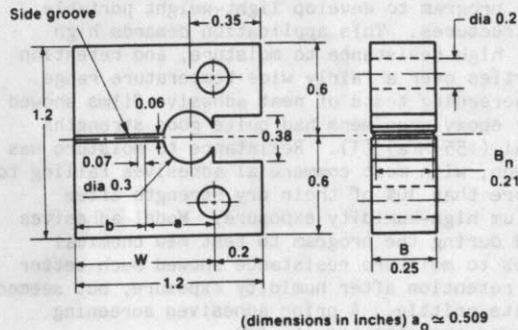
Dimensions of a 1/2-plan compact tension specimen.
